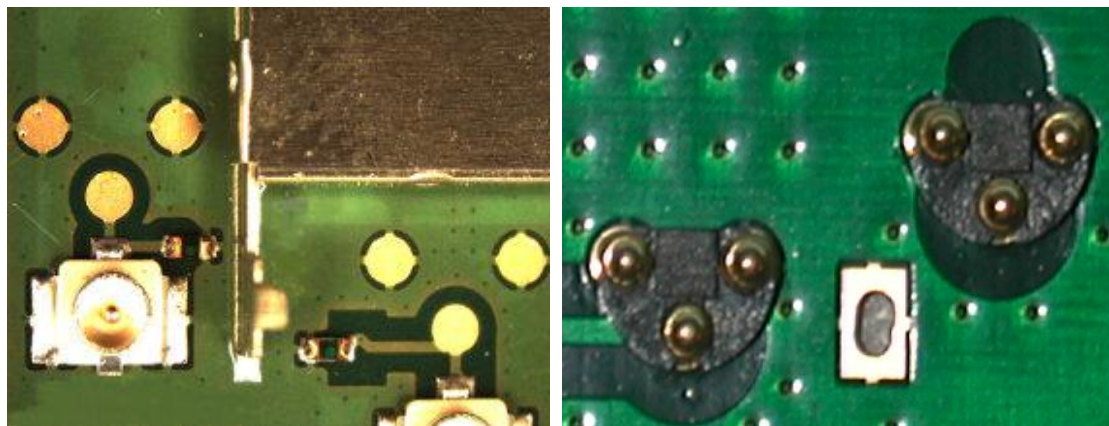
Assembly process – Precidip connector on Q26EL (CPU board and customer board)
